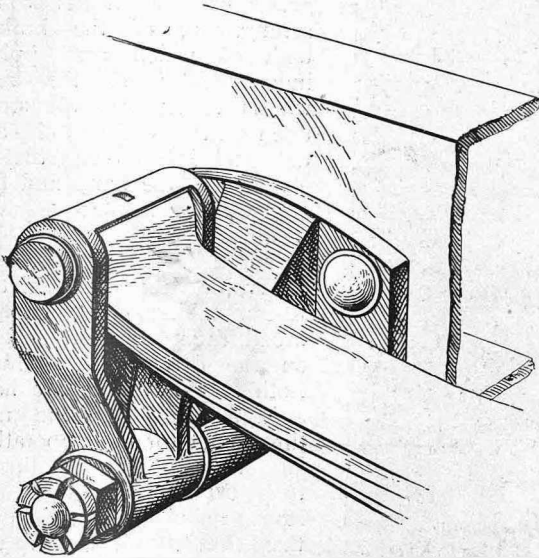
The method of attaching the rear springs on the Straker-Squire chassis.
